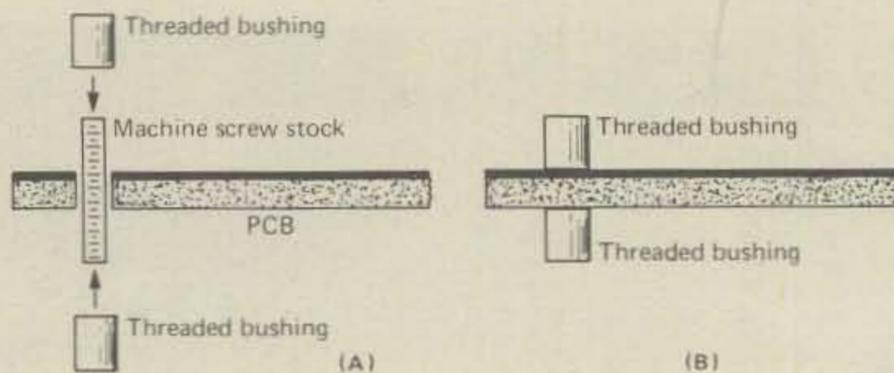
Using a machine screw and threaded bushings to mount a printed circuit board.
